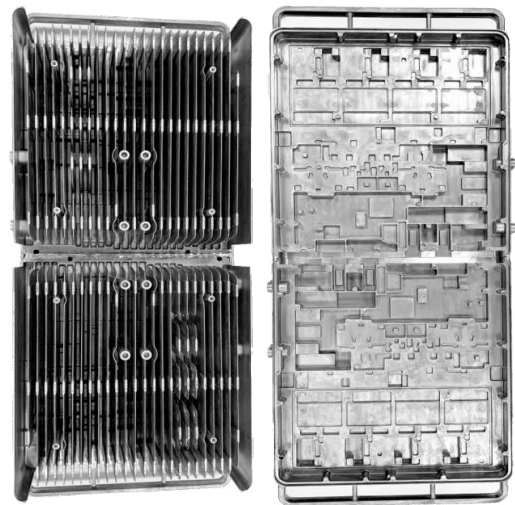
Example 5G housing made with the RheoMetal™ Rheocasting process using vacuum.
